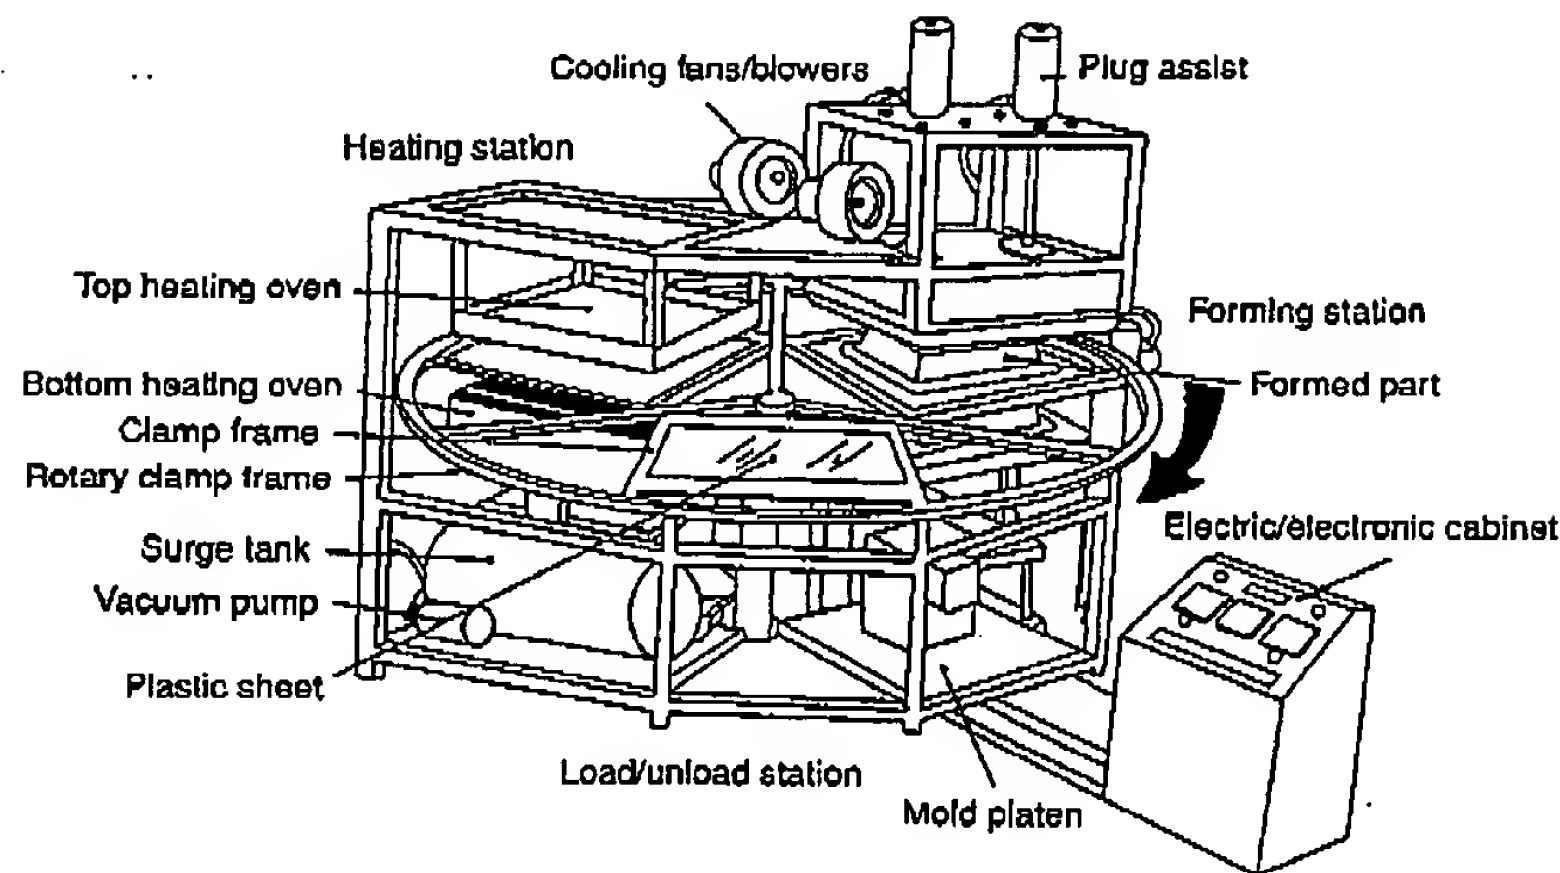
Schematic of heavy-gauge rotary thermoforming machine (15). Used with permission of Hanser Publications.
